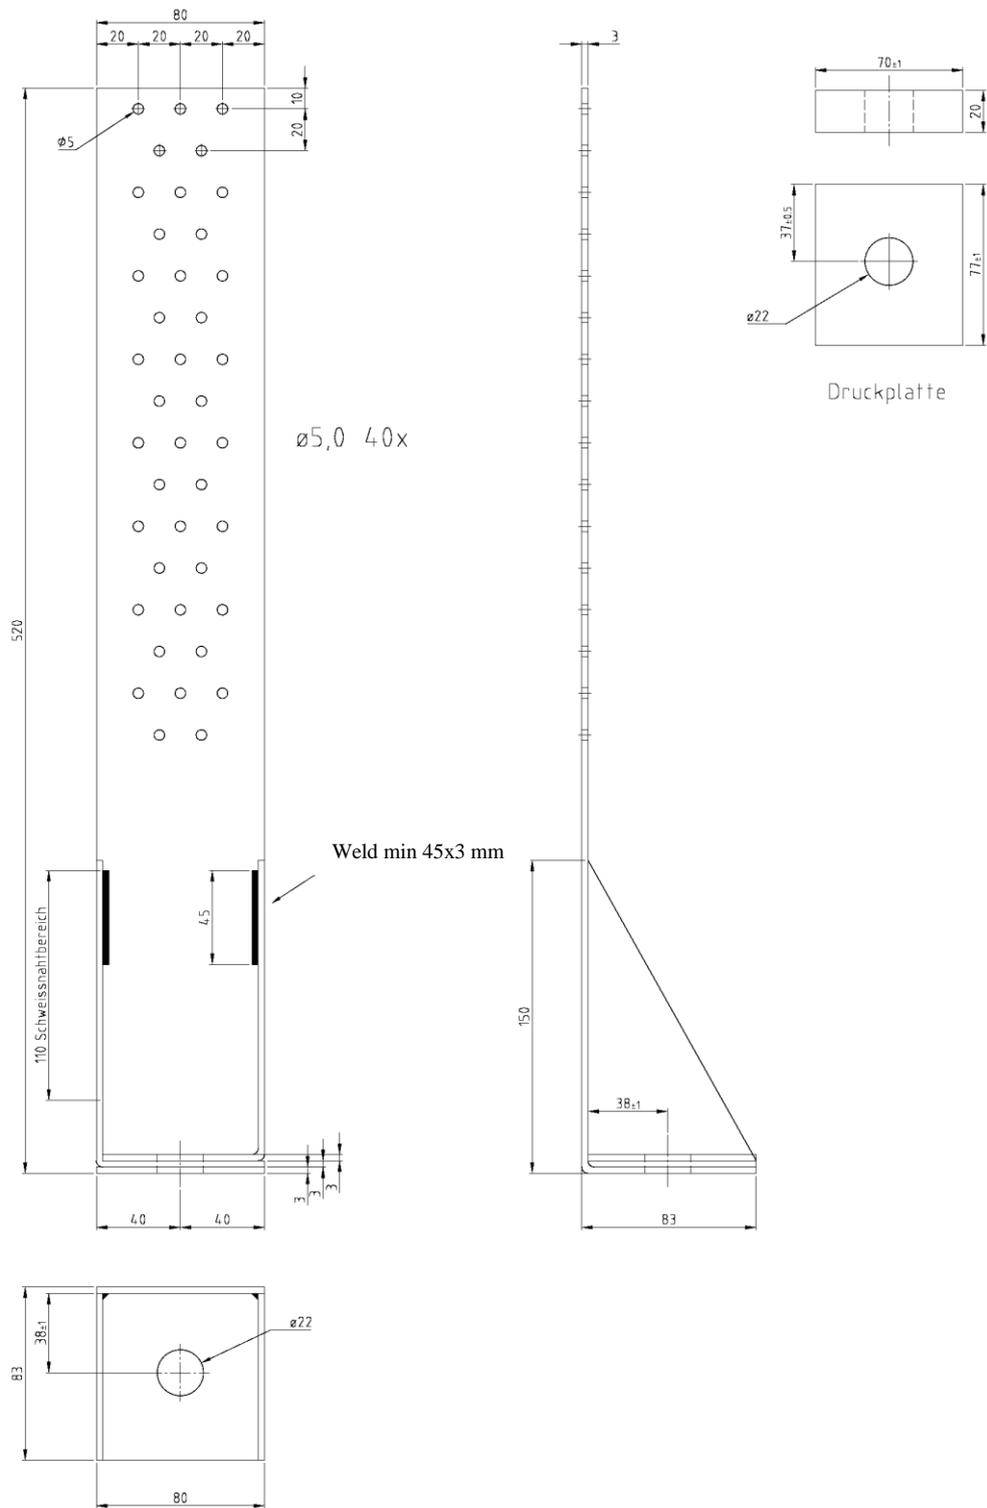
Dimensions of type GH HT32 80/520 (drawing with washer 77x70x20)
